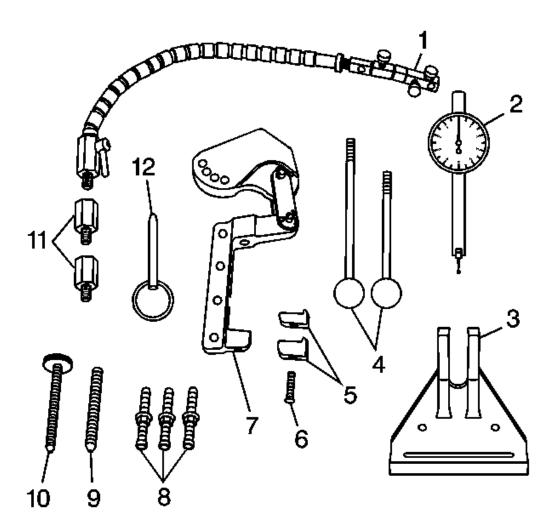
Identifying Rod Bearing Clearance Checking Tool Courtesy of GENERAL MOTORS CORP.
